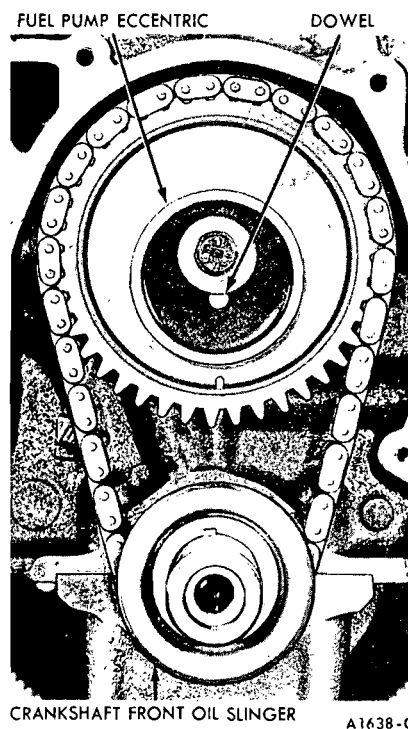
Fuel Pump Eccentric and Front Oil Slinger Installed
